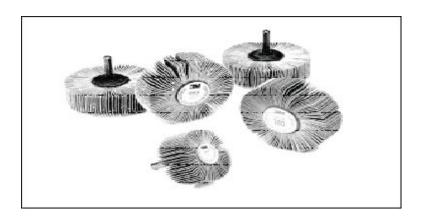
Abrasive Flap Wheels with Spindle Mount
